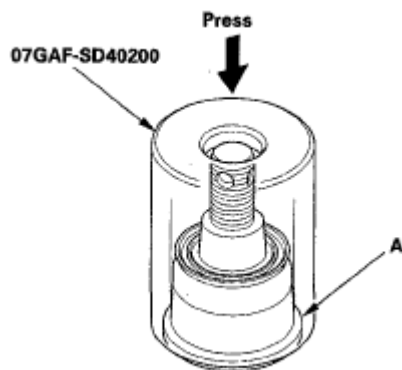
Identifying Boot With Hub Dis/Assembly Tool
